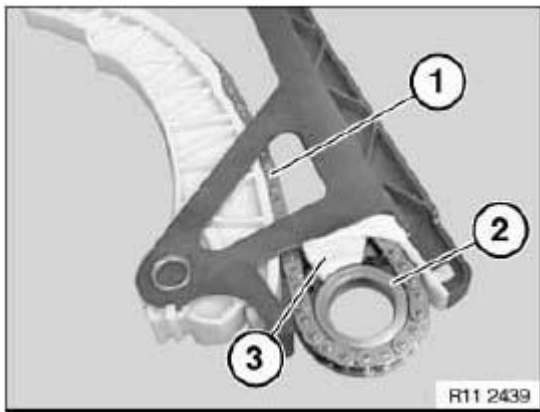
Identifying Timing Chain, Sprocket Wheel And Chain Guide
